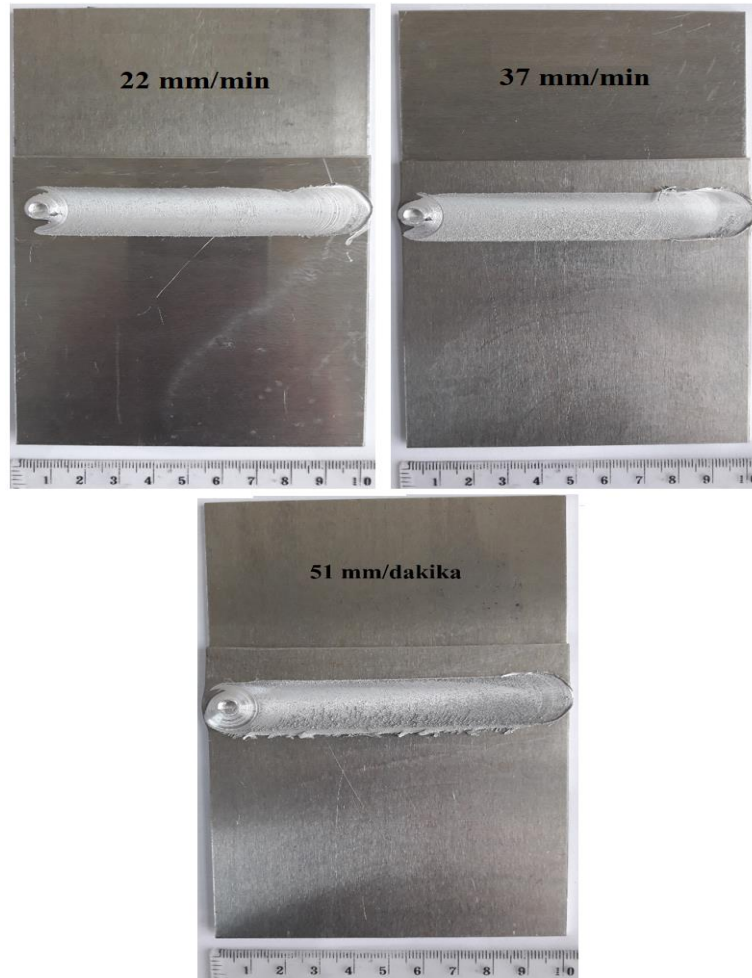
Sheets combined with the FSLW at various welding tool feed rates
